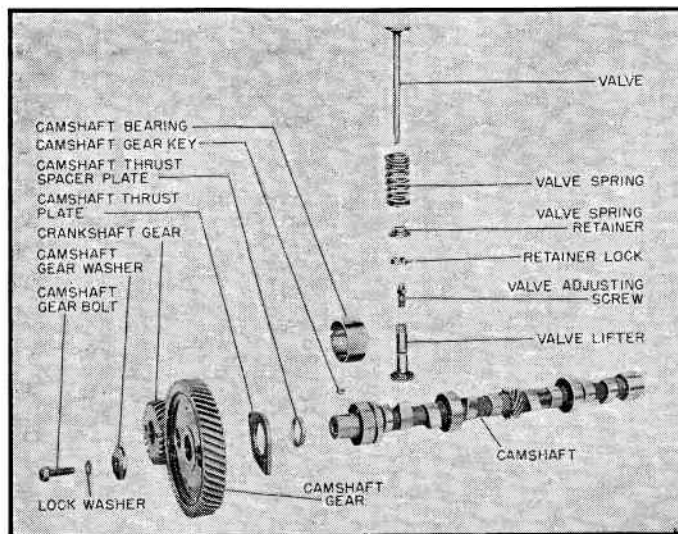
Layout of valve system. Four cylinder L-head engine. This is typical of the F-head engine except that the intake valve mechanism is contained in the cylinder head
